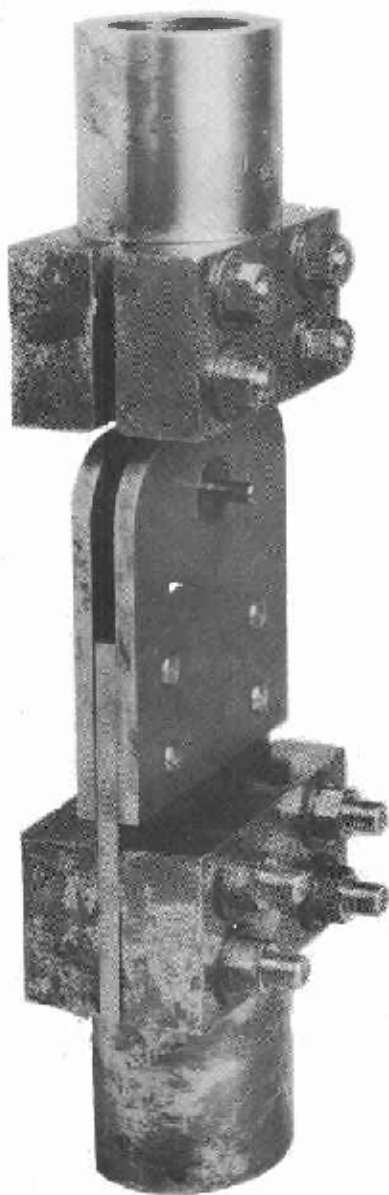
Grips supporting the fatigue specimen, which is loaded axially in tension and compression in a direct-stress fatigue machine.
